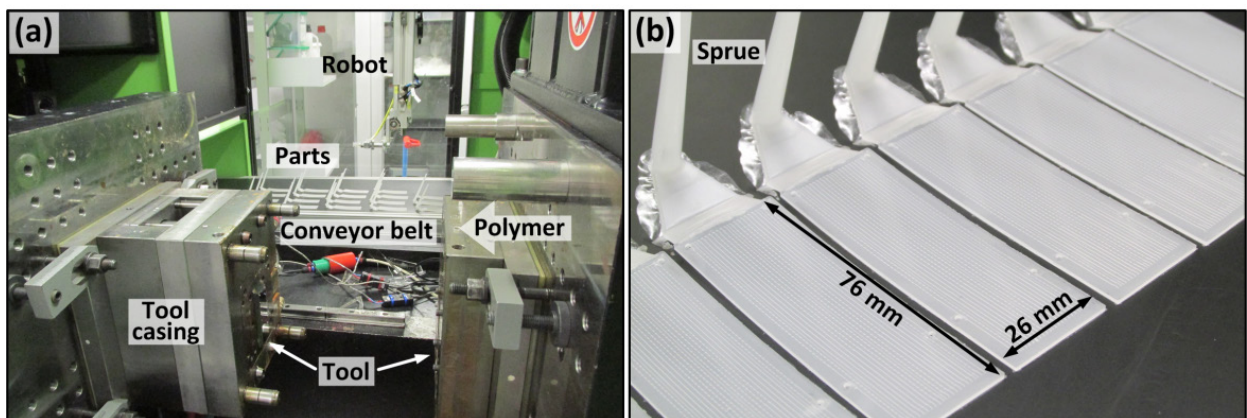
Photographs of (a) the injection molding machine and (b) polymeric lens parts.
